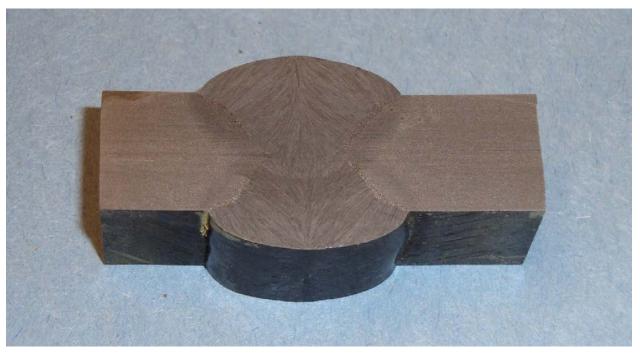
Sample Macro, ¹/2" DS Weld Procedure
